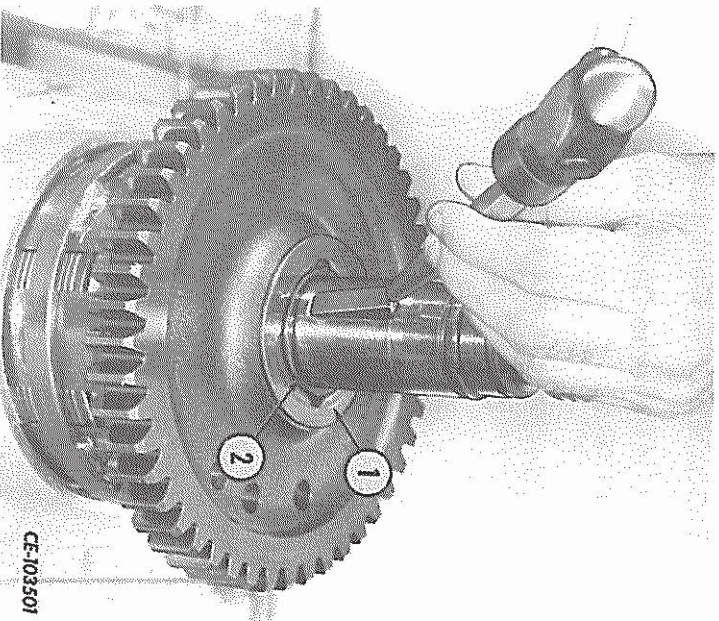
Installing the Gear Key (Forward Clutch Shaft Shown, Reverse Clutch Shaft Similar)
